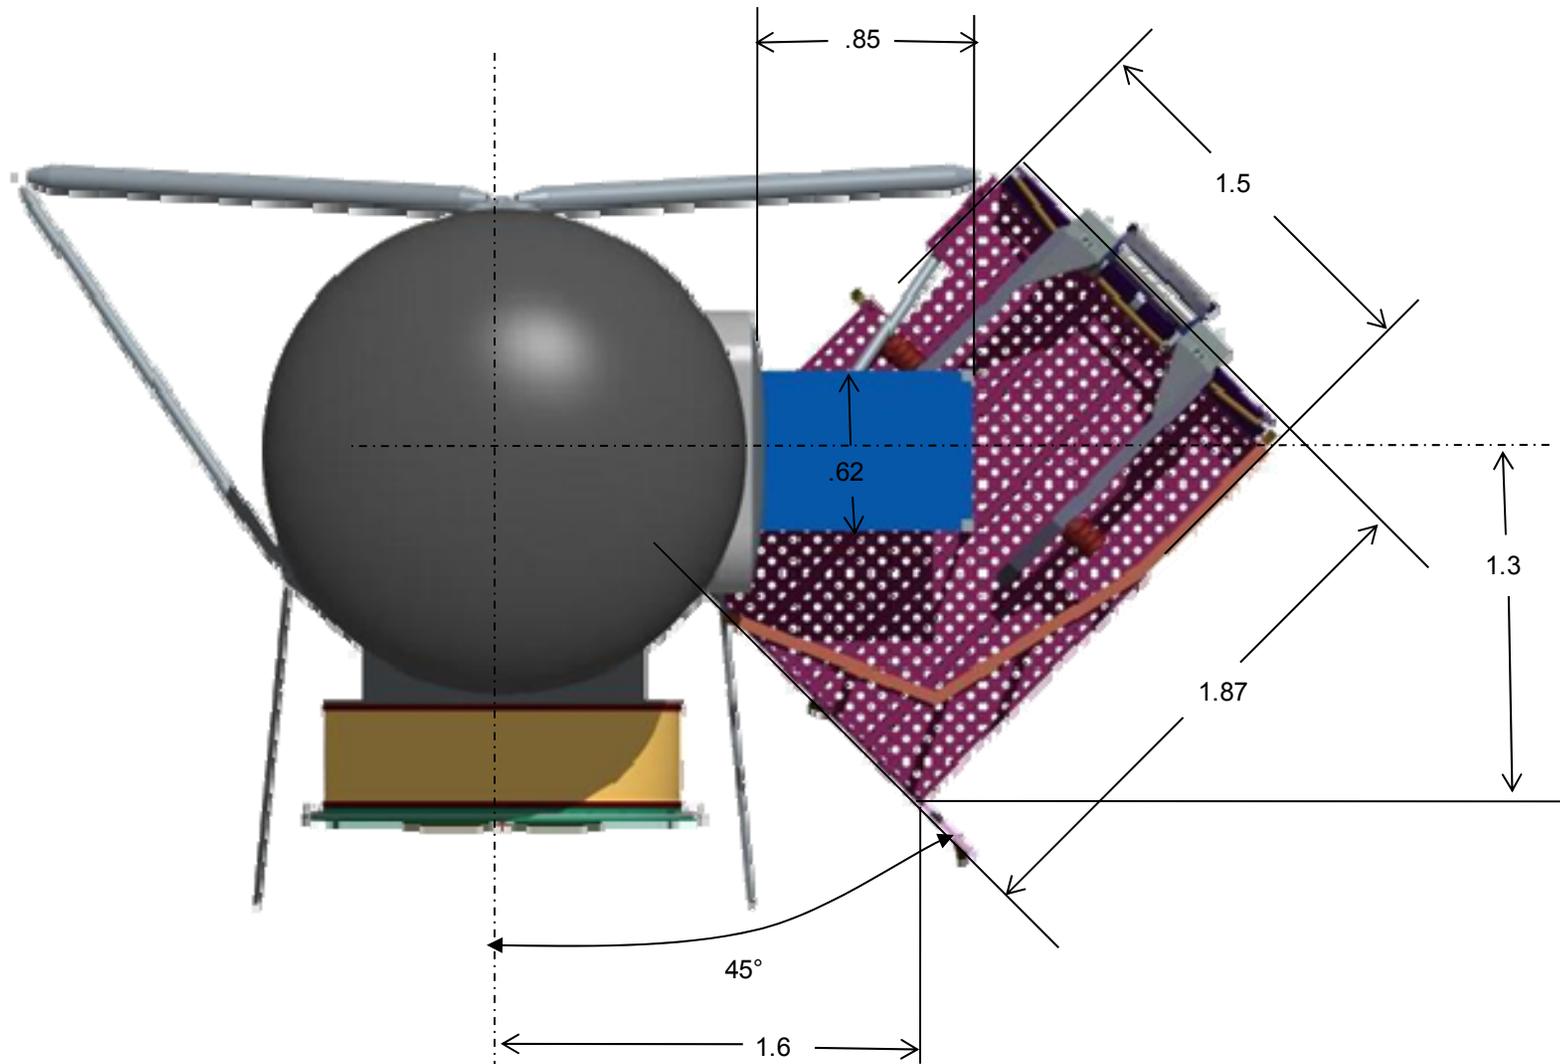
Top view showing porch dimensions used for mock-up fabrication (dimensions in meters).
